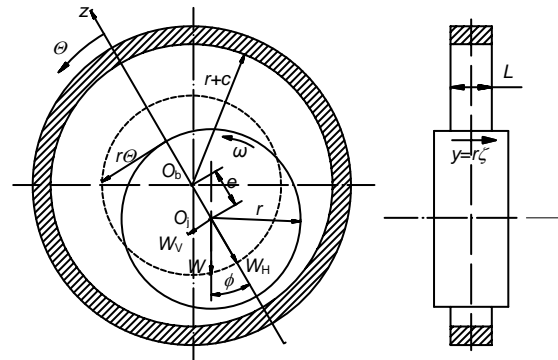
Enlarged schematic sketch of micro gas journal bearings
